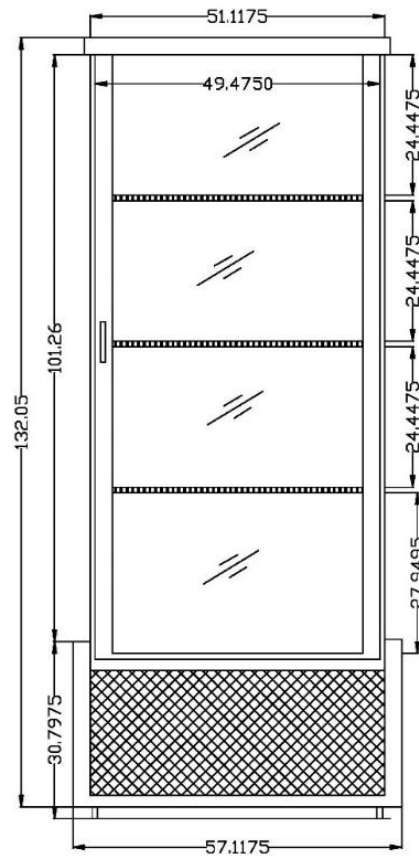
Schematic of the cylindrical refrigerator (dimensions in cm)
